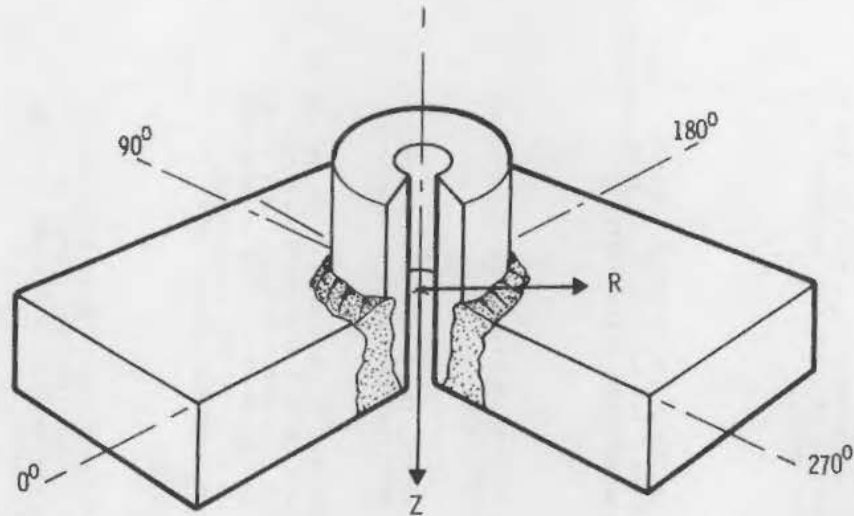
PVRC Weld Specimen 204
